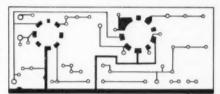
Wiring layout made in pencil before transferring to foil. Note eyes, socket layout and connecting lines.
